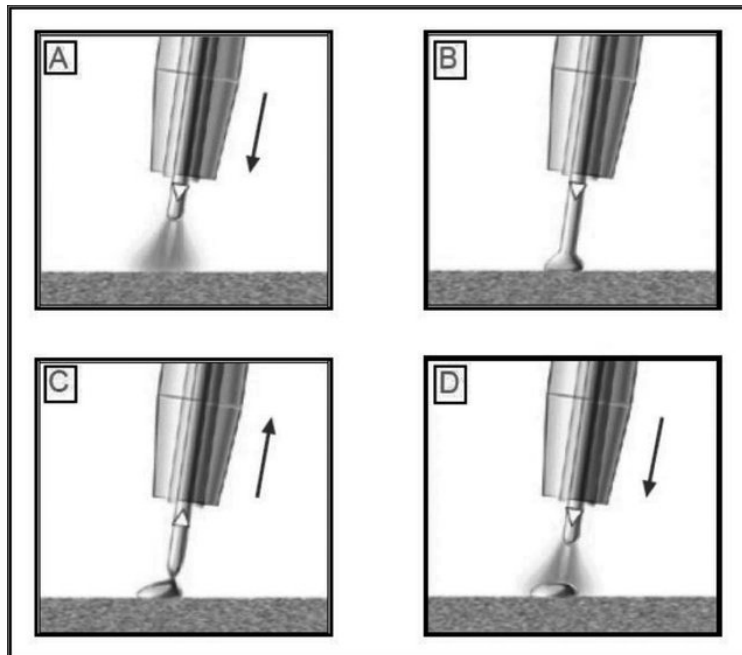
Cold metal transfer: By oscillating the wire feed, CMT welding achieves a more stable form of short arc welding. When the welding wire is moved close to the surface to be welded, a short circuit occurs. The wire is then retracted, leaving behind a droplet of melted material. Image from[32]/www.Fronius.com, Creative Commons CC BY 4.0.
